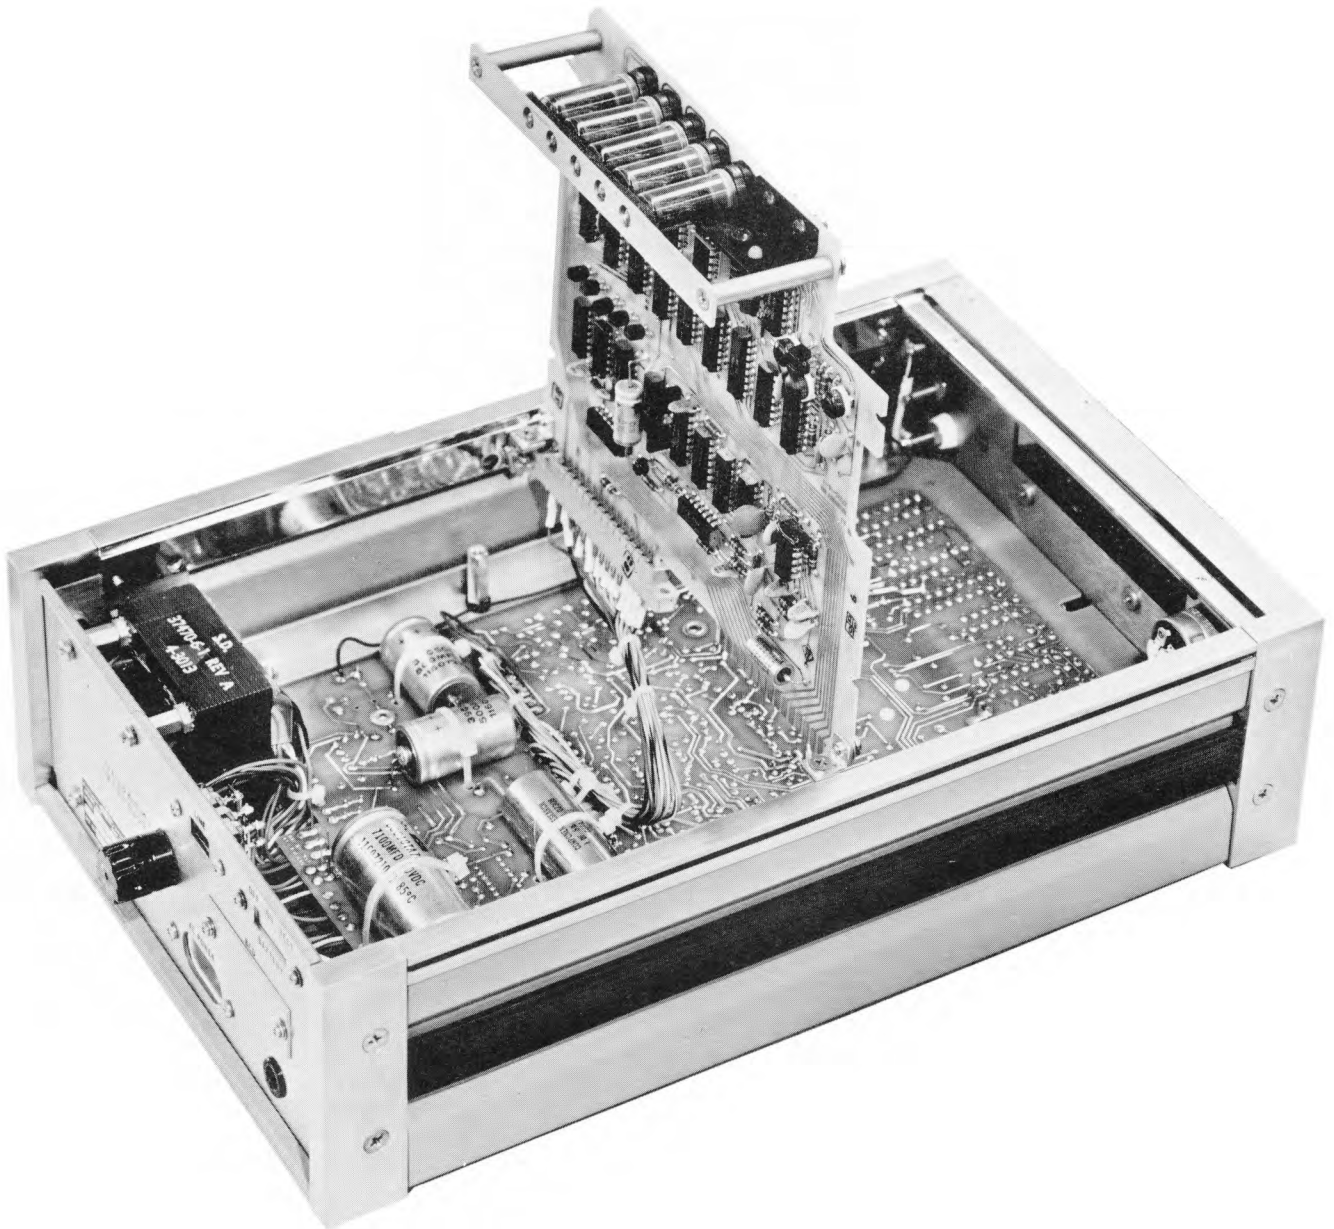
MOUNTING THE A1 READOUT BOARD FOR ACCESS TO
